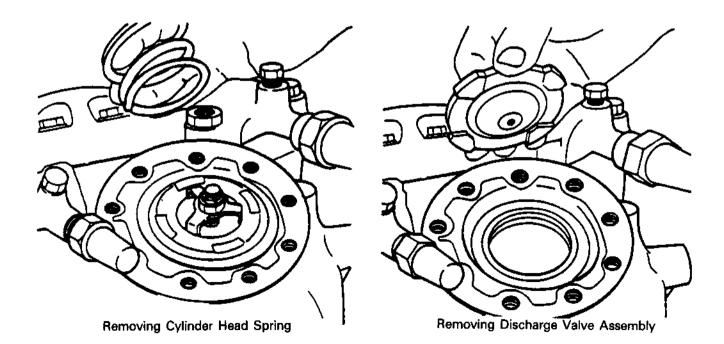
Removing Cylinder Head Spring and Discharge Valve
